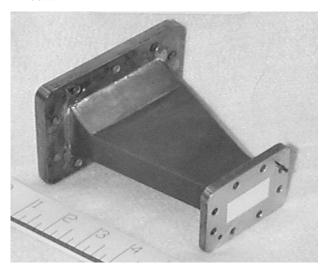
Rectangular waveguide transition assembly. This assembly converts from standard WR-284 waveguide to dielectric-filled WR-137 waveguide.
